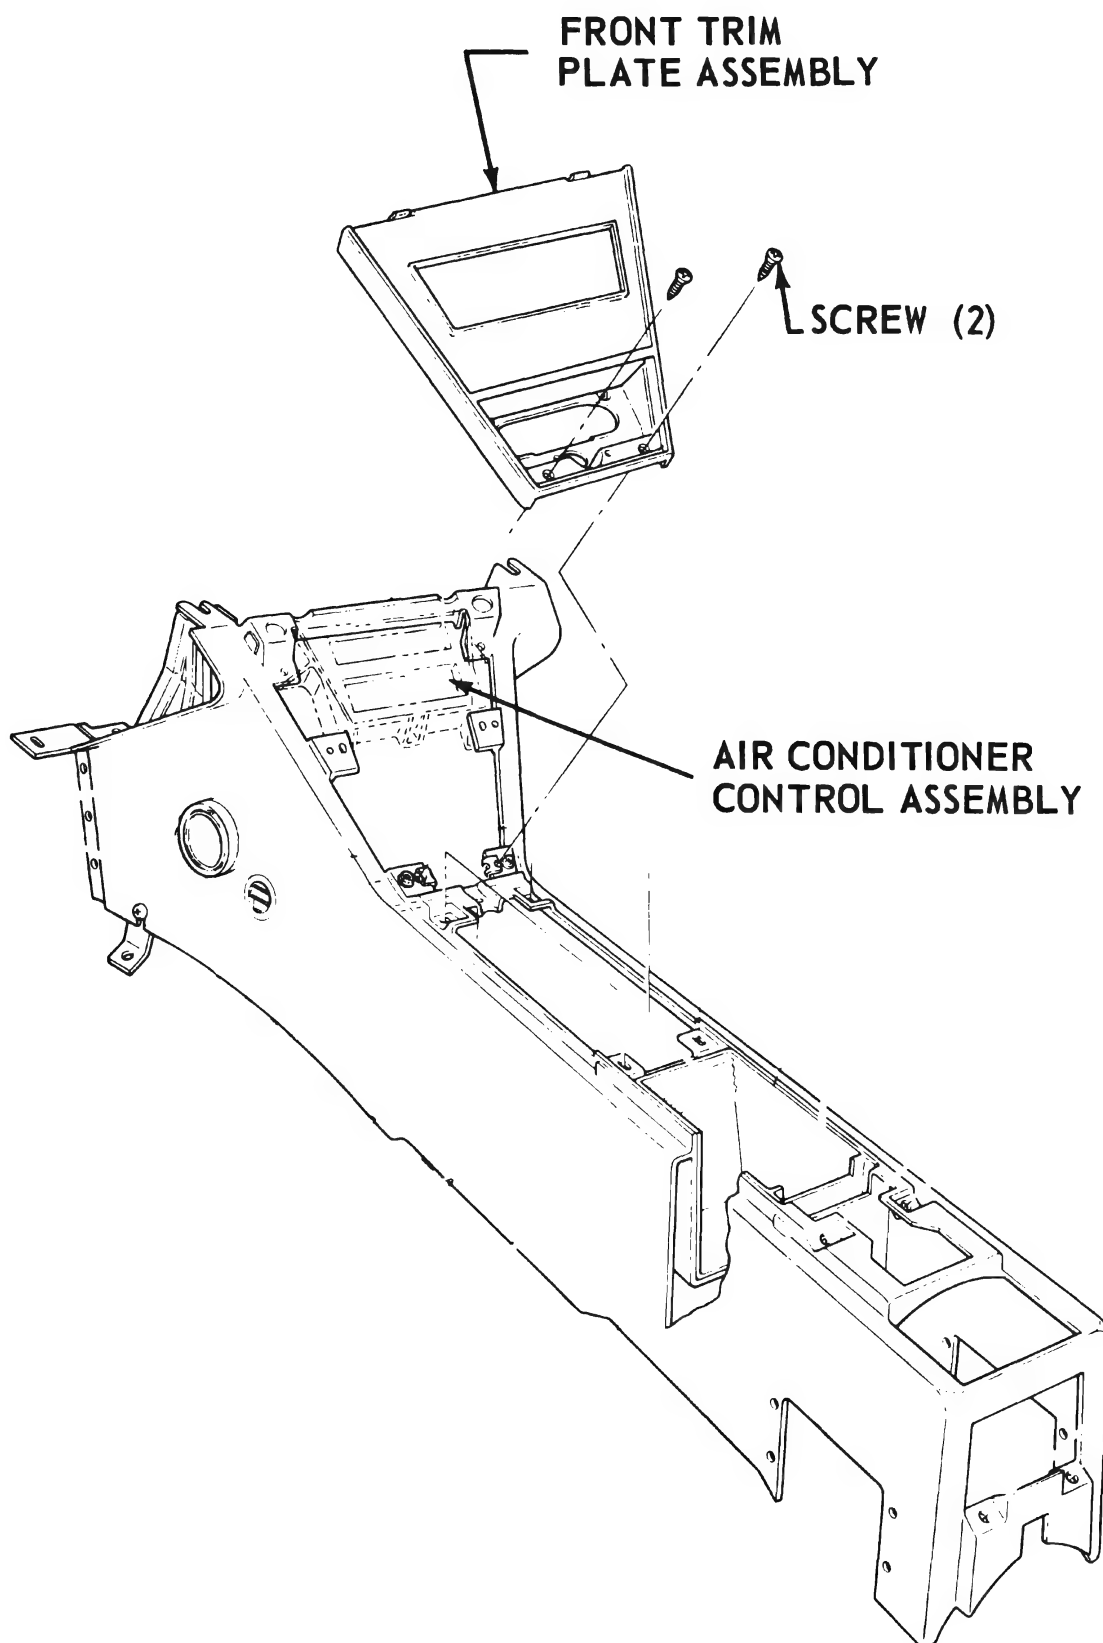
Center Console Front Trim Plate and Air Conditioner Control Assembly - 4700 Series
